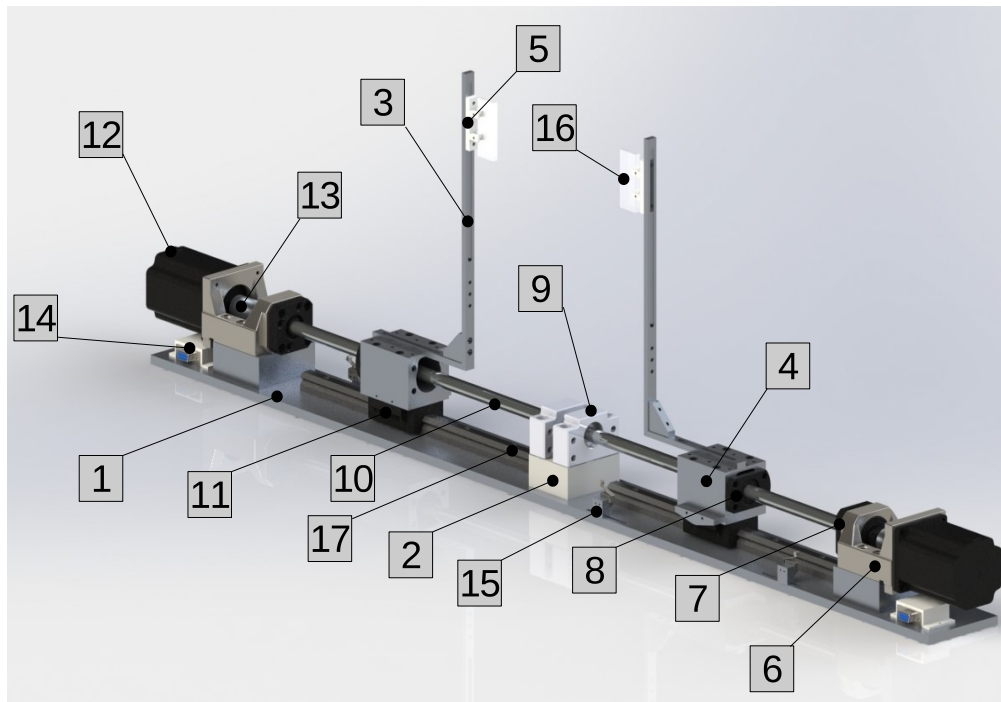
A 3D drawing of the double linear stage with mounted plastic scintillators. 1 – base plate, 2 – block for support, 3 – holder for the scintillator, 4 – ballnut bracket, 5 – plastic holder for the scintillator, 6 – motor mounts (MBA 10-C), 7 – ballscrew support (FK10-C7, with mounting method B), 8 – ballnut (R1204T3-FSKD), 9 – ballscrew support (BF10-C7), 10 – ball-screw (R1204-C7, length 400 mm), 11 – bearing block (BGX-H-15-FN-ZF), 12 – stepper motor (SY57STH76-4004A NEMA23), 13 – flexible coupling (BF-D25L34), 14 – DB9 connector, 15 – microswitch (HONEYWELL 1SX1-T), 16 – plastic scintillator, 17 – normal grade profile rail (BGR-15-LN, length 294 mm).
